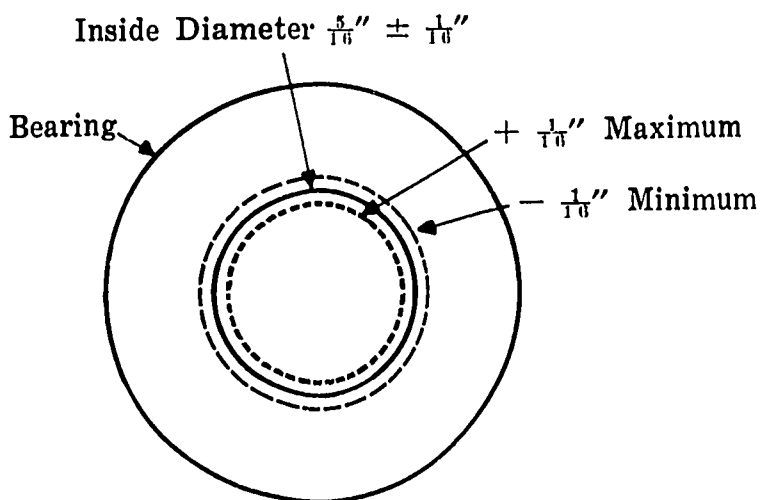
Bearing, with Maximum and Minimum Tolerance Shown
